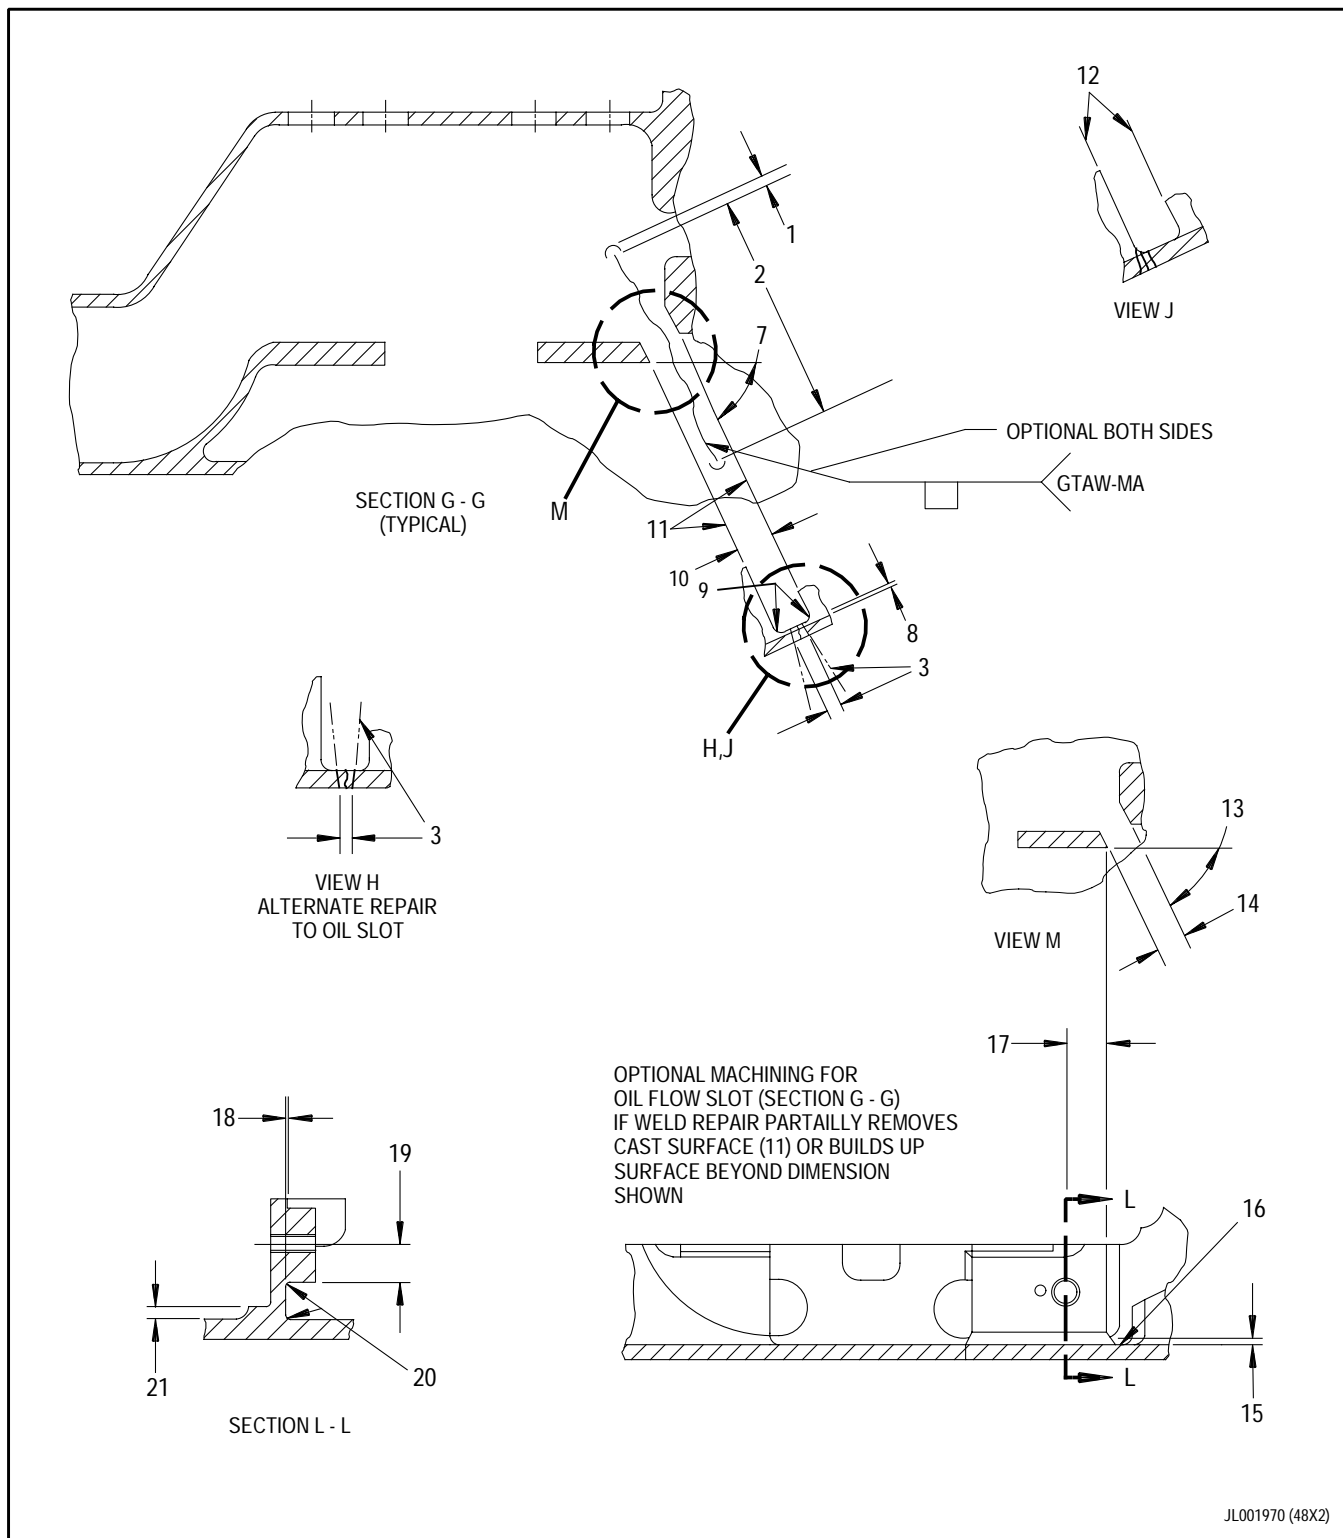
Gearbox (Rear) Housing Assembly - Weld Repair of Cracks (Sheet 2 of 2)
